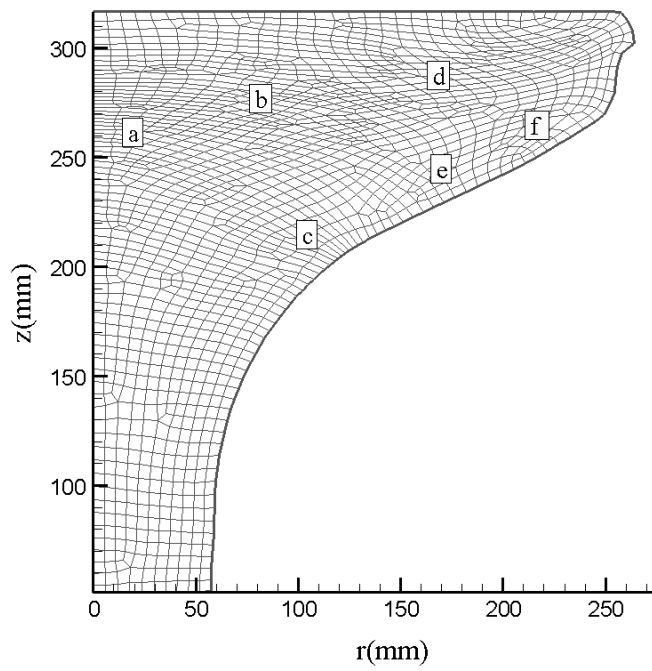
Inspection positions at the section of exhaust valve head (90MC)
